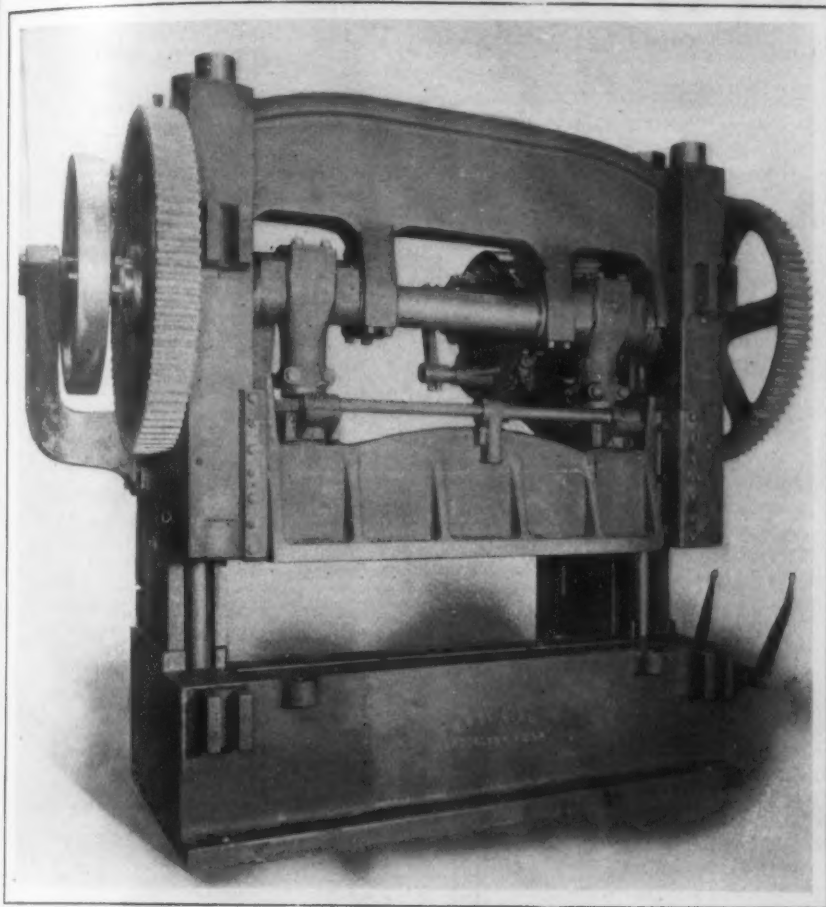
A Press of the Combination Tie Rod and Gap Frame Type with the Gearing Mounted on the Housings Over the Crankshaft
